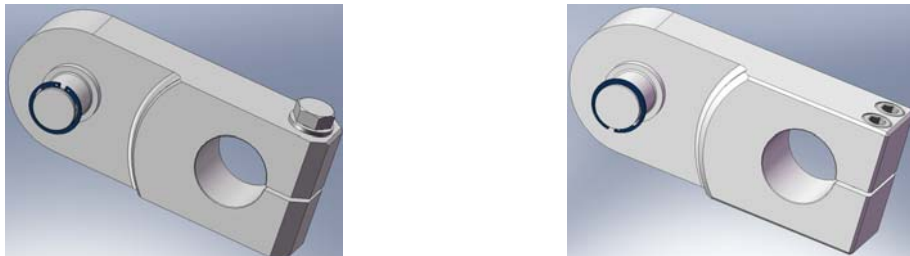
crank fitted with one M16 bolt or two M12 bolts
